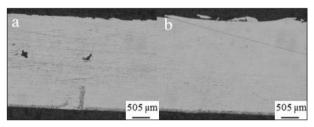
Macrographs showing SZ in a) FSW without TIG b) TIG-assisted FSW.
